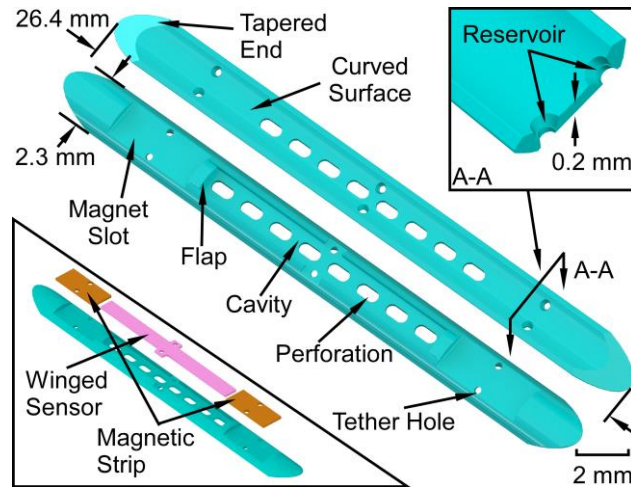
Schematic of the top and bottom views of the Type F package. The bottom left inset shows the assembly of the magnetic strips and winged sensors. The top right inset indicates a cross section view of the reservoir feature.
